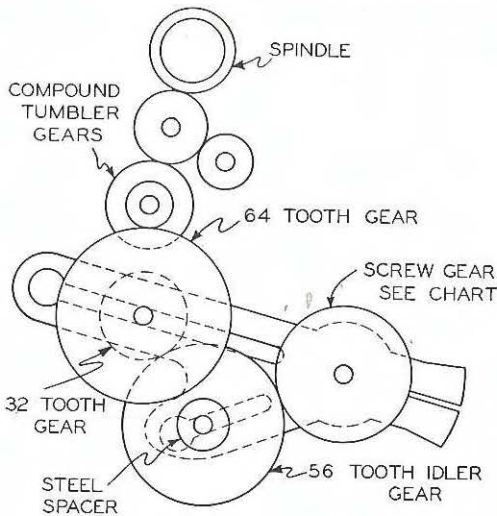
Gear set-up for 72 and 80 threads per inch.
